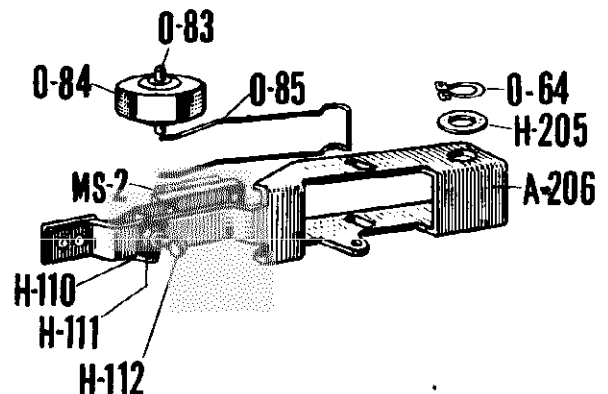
PRESSURE WHEEL ASSEMBLY
